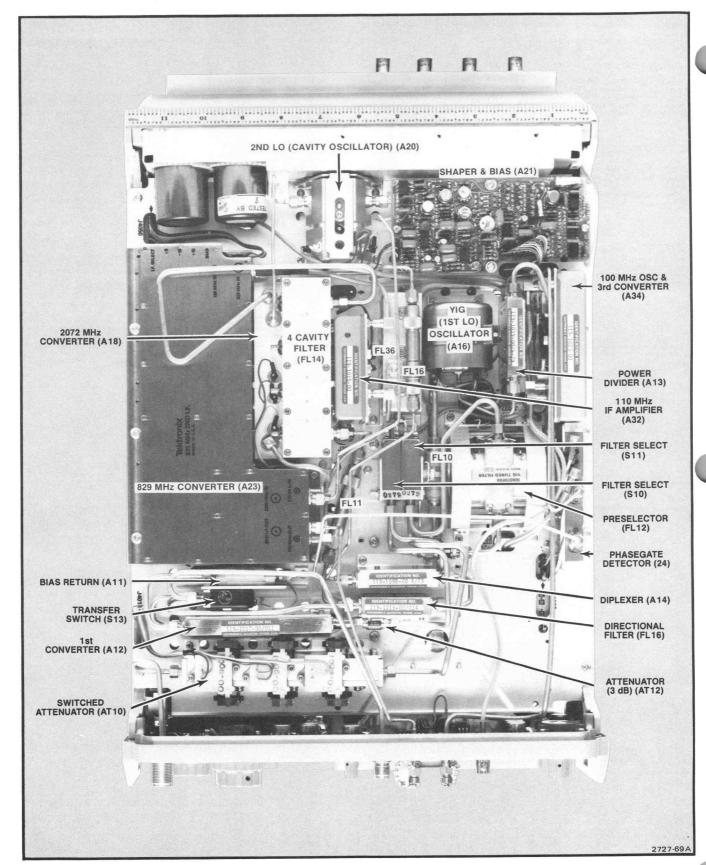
View of the 492 RF deck showing major assemblies and circuit boards.
